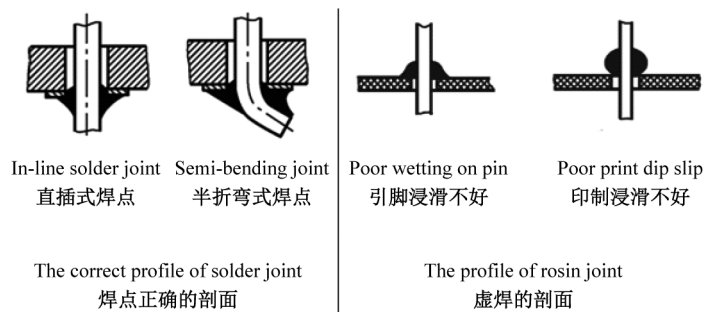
The Correct Solder and Rosin Joint 正确焊点与虚焊
